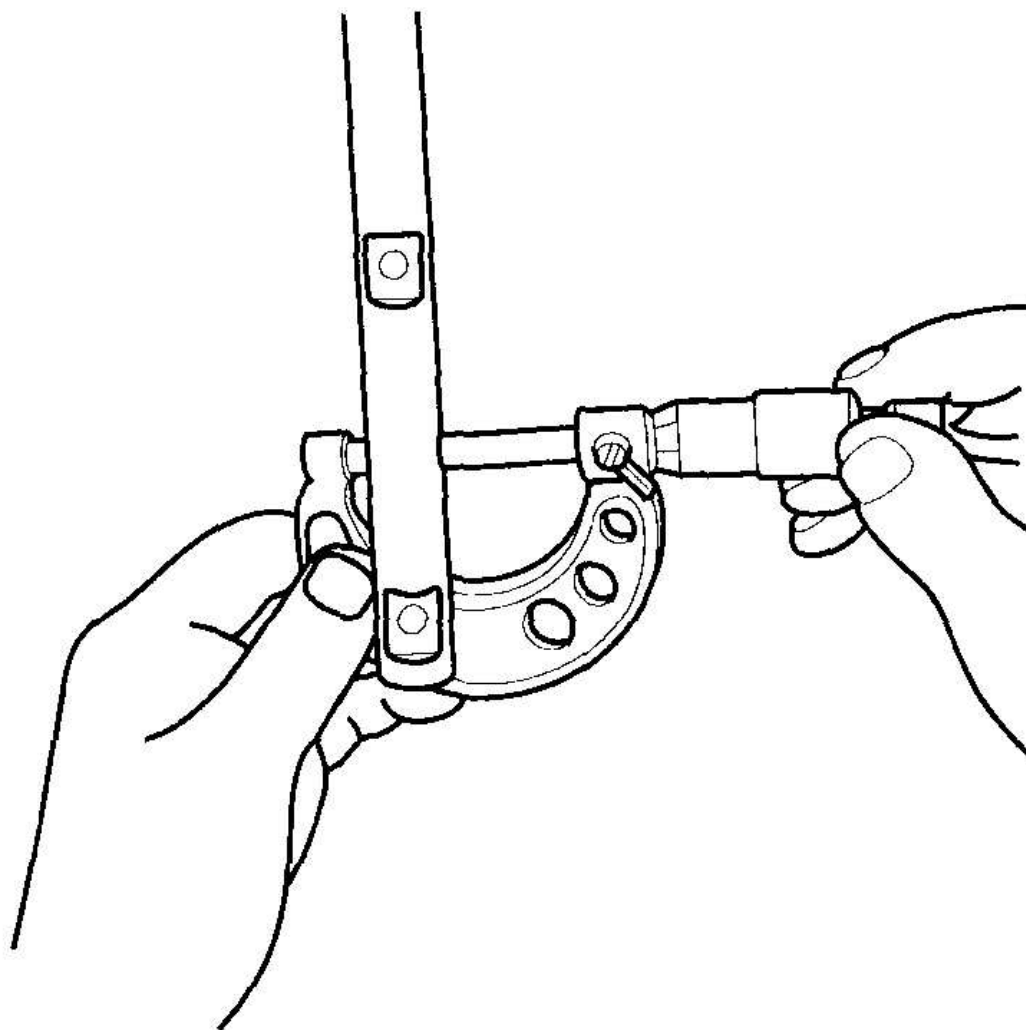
Identifying Rocker Shafts And Rocker Arms
